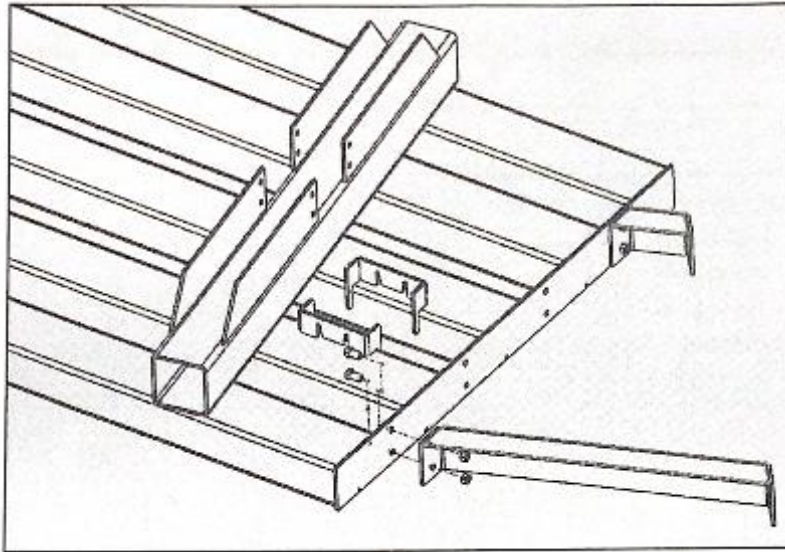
Attach inner and outer interskid braces with supplied 1/2" bolts
